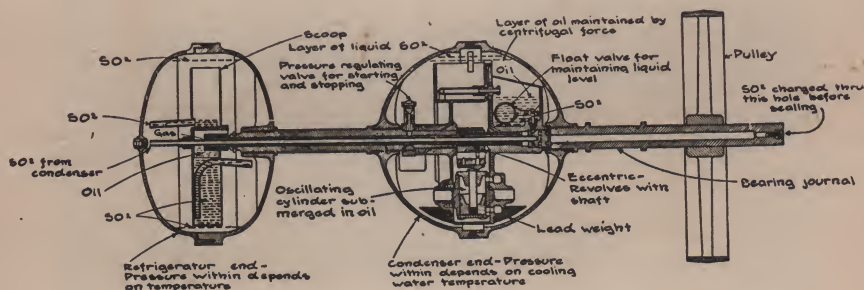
SECTION OF AUDIFFREN REFRIGERATING MACHINE.
